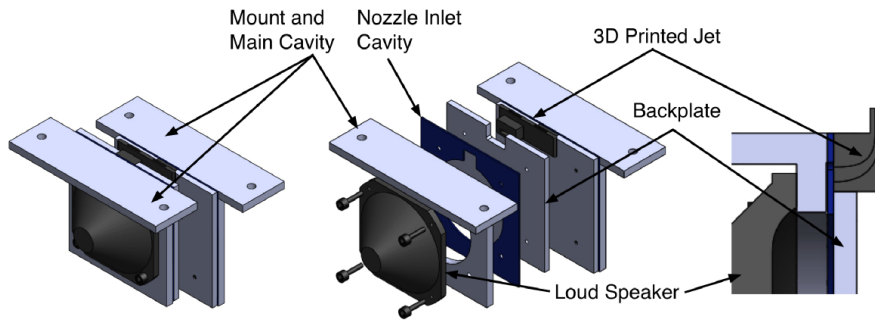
Assembly and exploded view of the jet assembly with a section view of one of the jet nozzles (from left to right).
